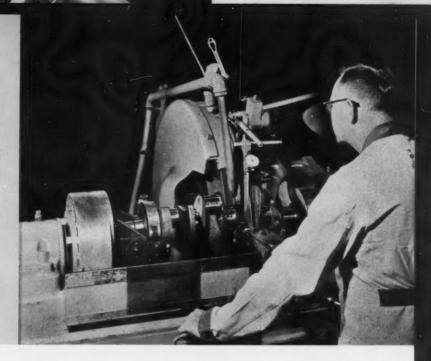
Pin-locking indexplate on the left-hand pot chuck insures accurate indexing when rough-grinding pin bearing surfaces of crankshaft.
